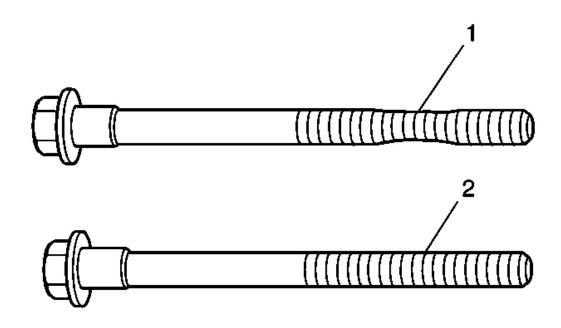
Inspecting Connecting Rod Cap Bolts Courtesy of GENERAL MOTORS CORP.
